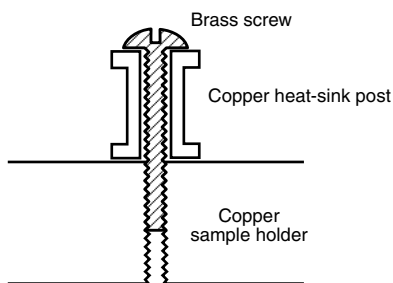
Example of choosing materials that will tighten a joint on cooling. The brass screw contracts more than the copper heat-sink post, increasing the pressure holding the post against the sample holder.
